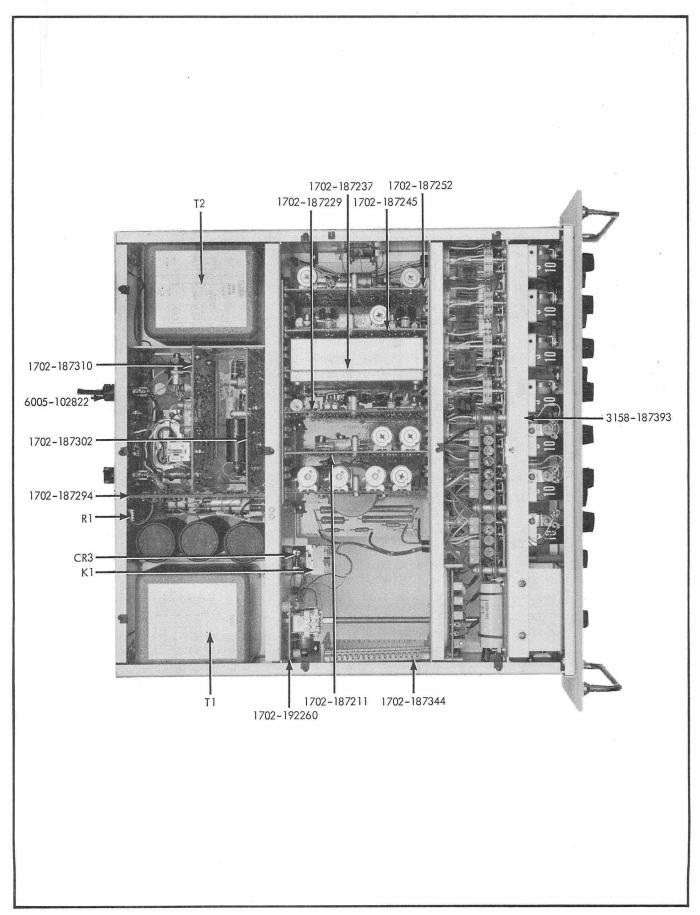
FINAL ASSEMBLY (Sheet 1 of 2)
